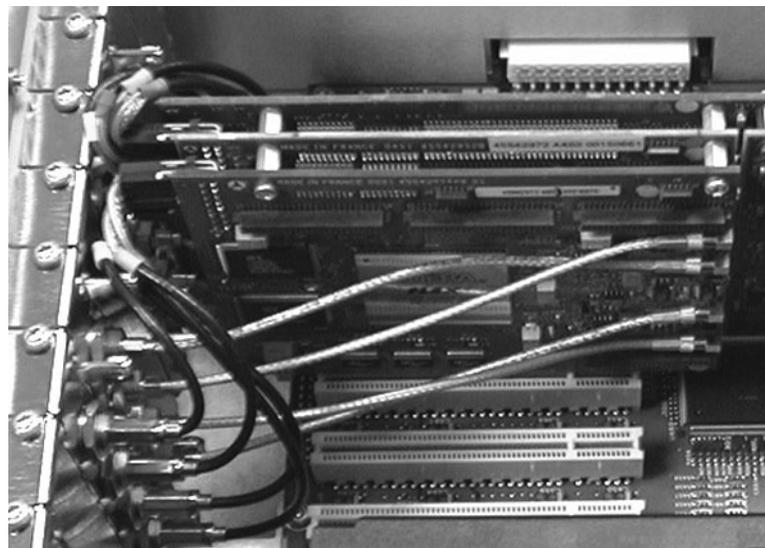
shows the completed installation of an additional SSI or ASI board and rear-panel connectors.
